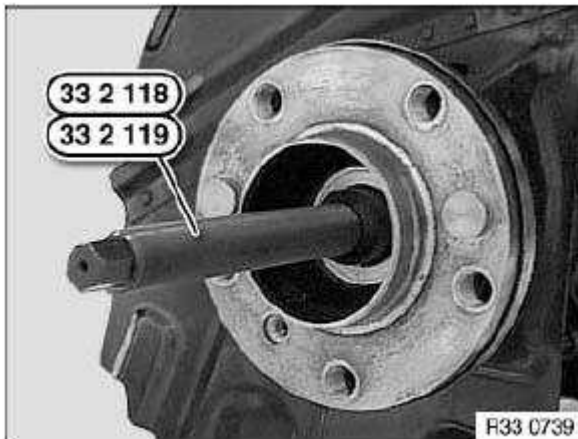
Special Tool (33 2 118) And (33 2 119)
